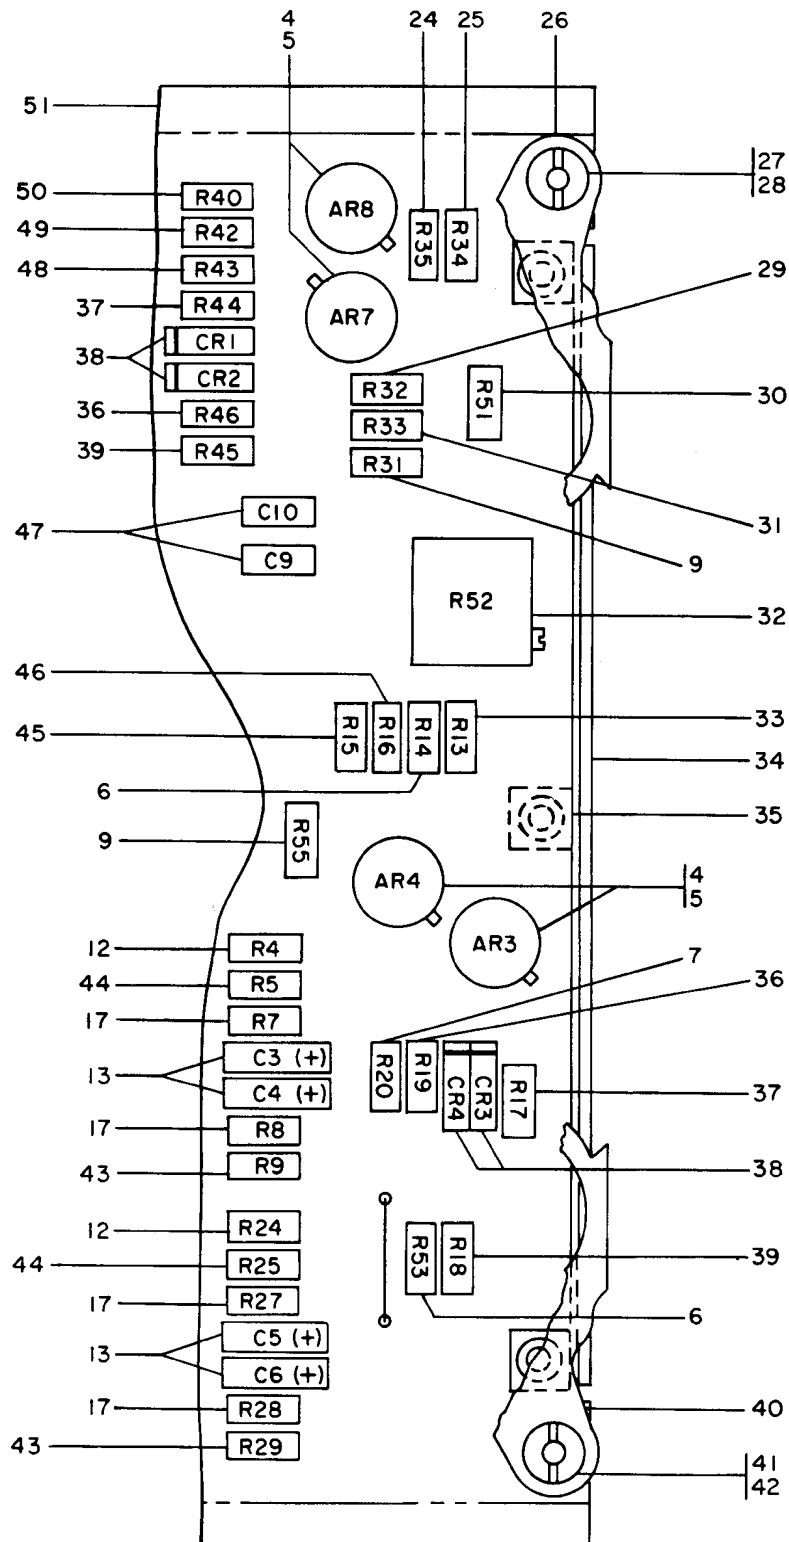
Circuit Card Assembly (A4) (Sheet 1 of 2)
